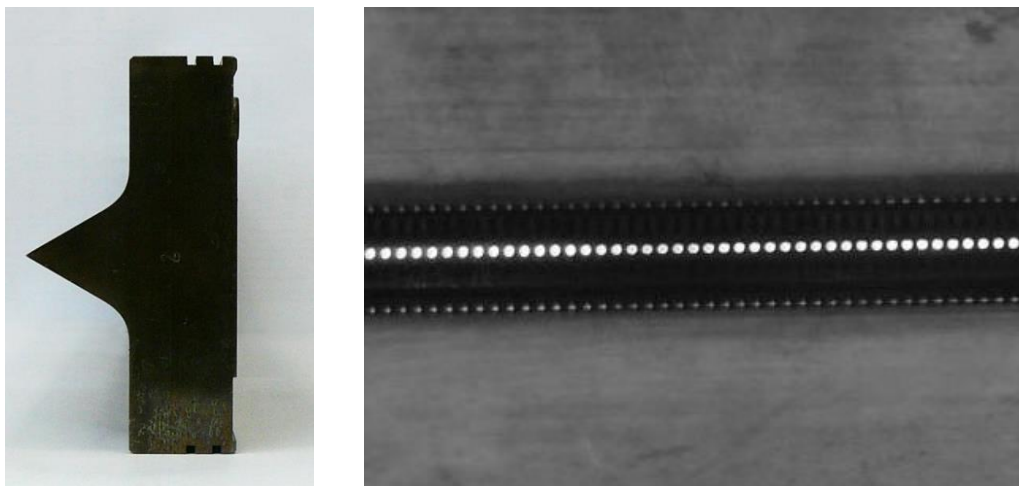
Detailed view of utilized MB die (left – side view, right – front view showing 0.4 mm diameter holes)
